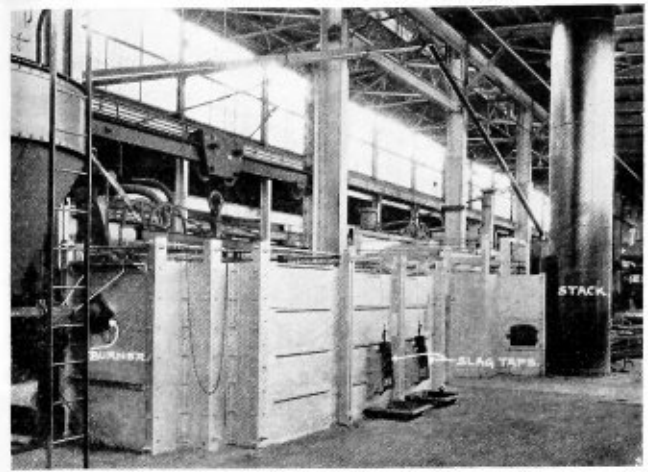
Back view of heavy forging furnace showing slag taps, draft doors and stack
